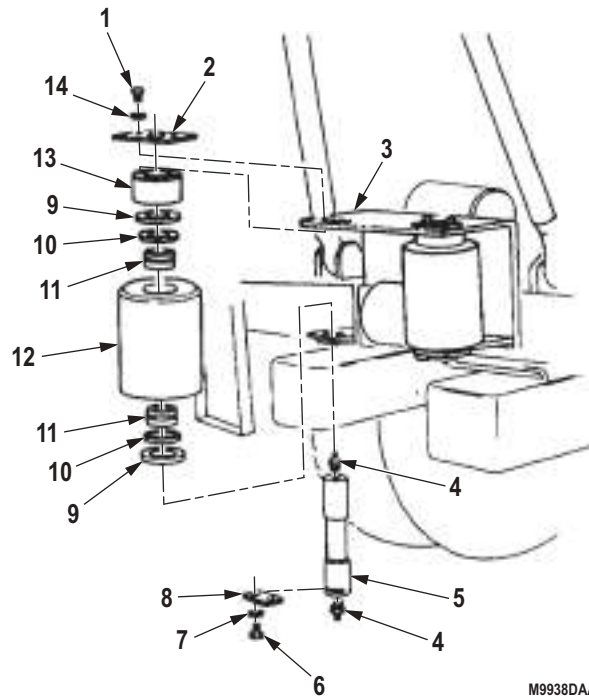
Rear Winch Roller Repair - Side Roller Assembly.
